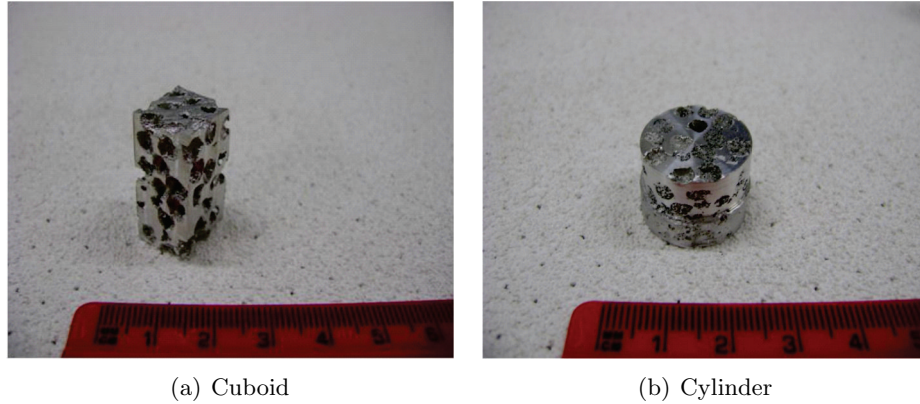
Aluminium foams obtained in different shapes after machining, the scale is in cm. (a) Cuboid shape and (b) Cylindrical shape.
